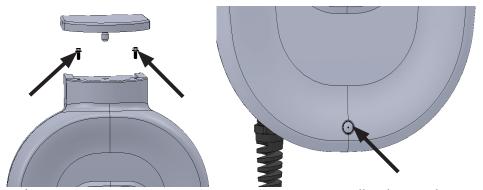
Remove 2 M3x6 screws using 2.5mm allen key and M3x25 screw using phillips screw driver
